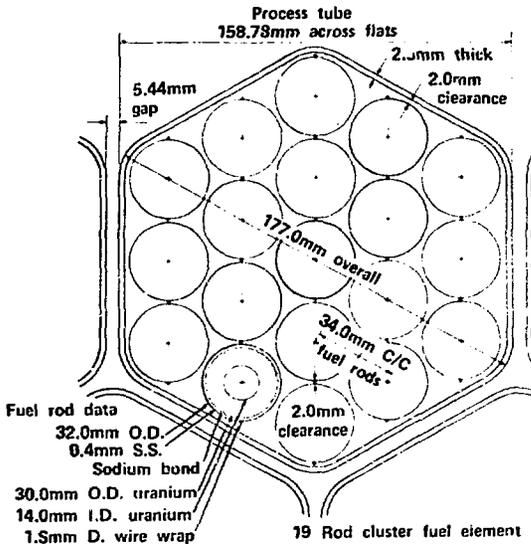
Fuel Assembly Cross Section (Full Size)
